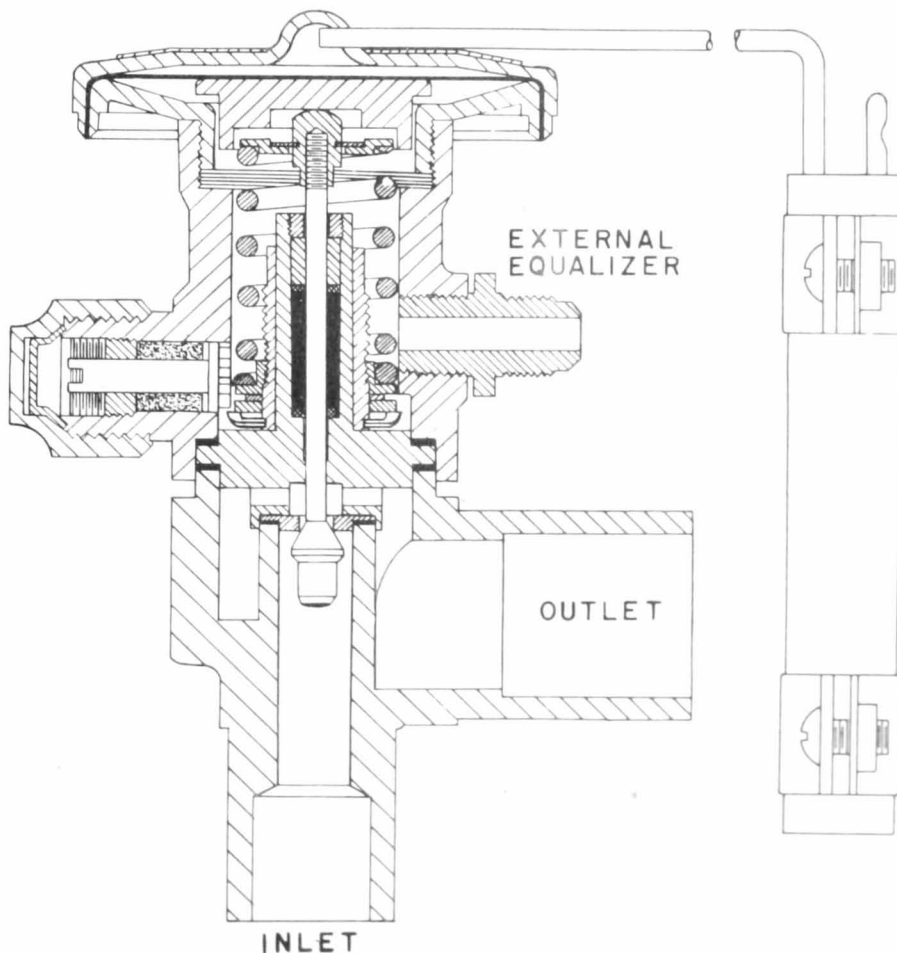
Cross-sectional view of a single-outlet thermo-expansion valve for Freon 12. (Photo courtesy of Alco Valve Company)
